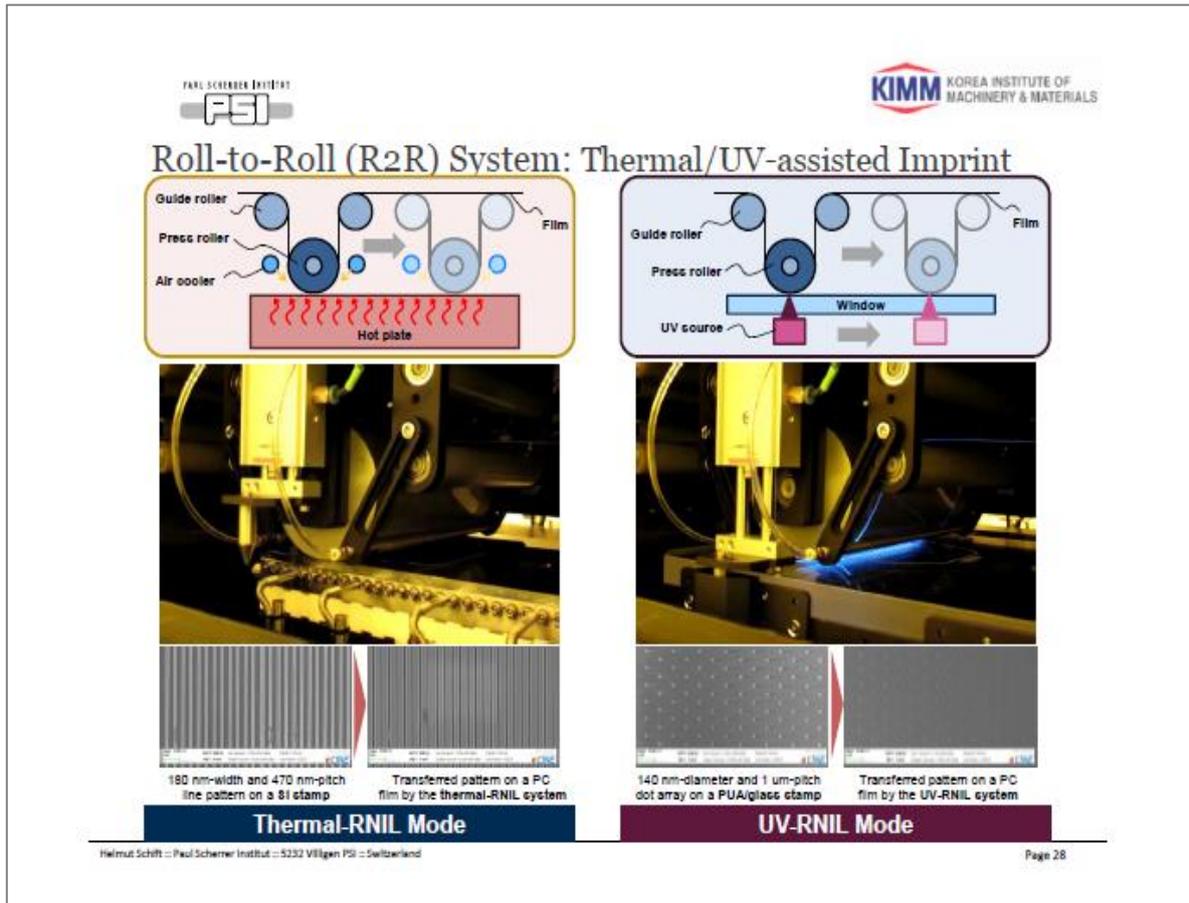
Roll-to-Roll (R2R) System: Thermal/UV-Assisted Imprint
